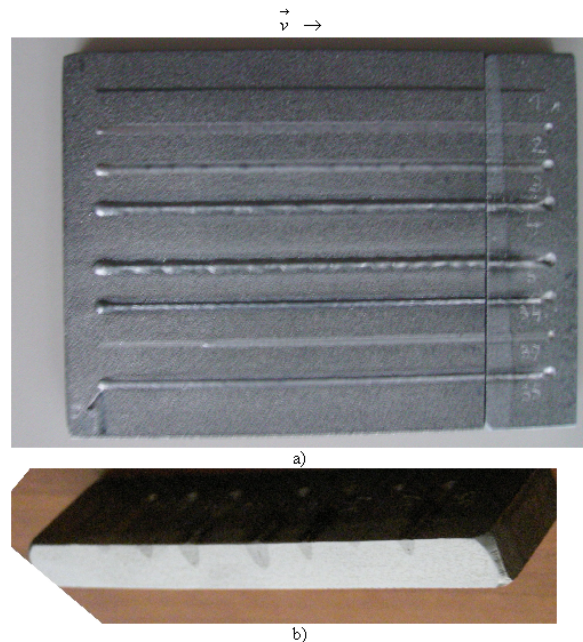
Photograph of the plate 1) Top view b) view section view, from left to right the welds: 1,2,3,4,5, 34,37,35
